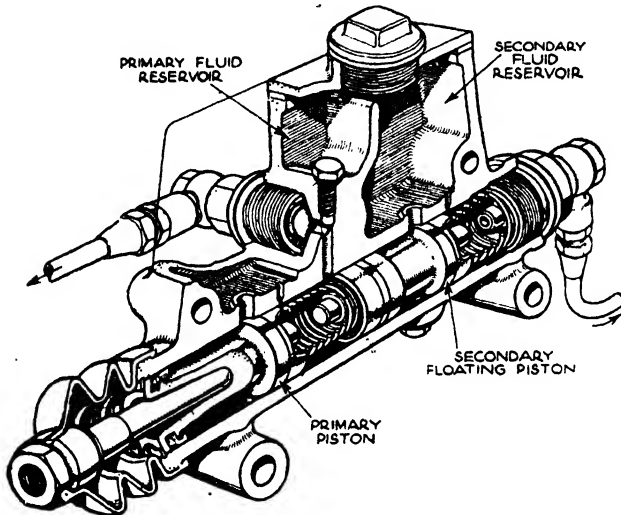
A PERSPECTIVE VIEW OF THE TANDEM MASTER CYLINDER, SHOWN IN SECTION
